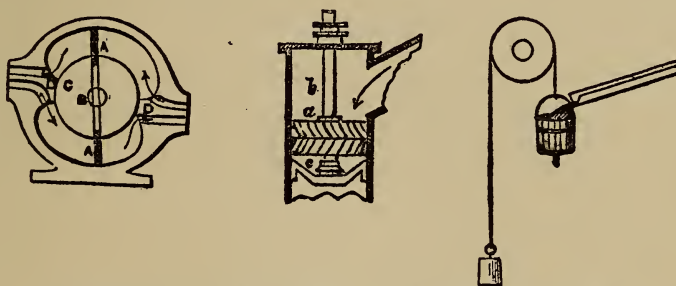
, 182, 183. For drawing curves. Rotary engine.
